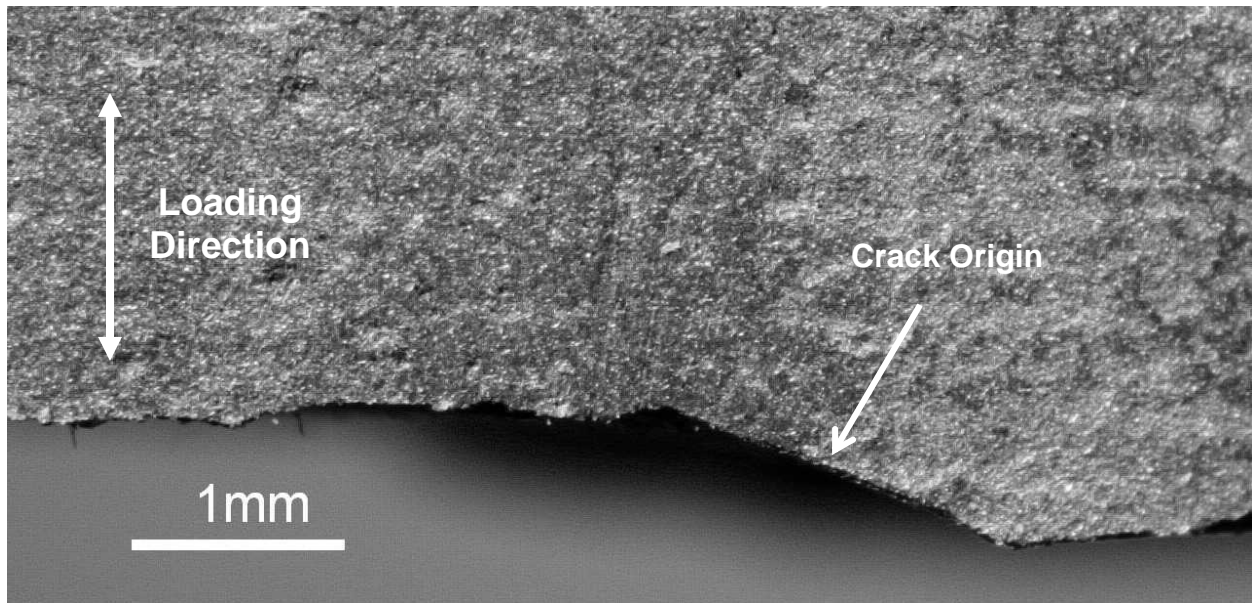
Shank Surface View of Crack Origin (Shank 0491)
